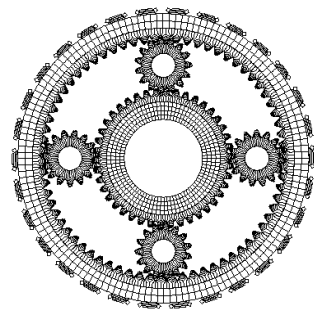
A model for increasing the ring gear rim thickness and decreasing the pinion gear inner diameter
